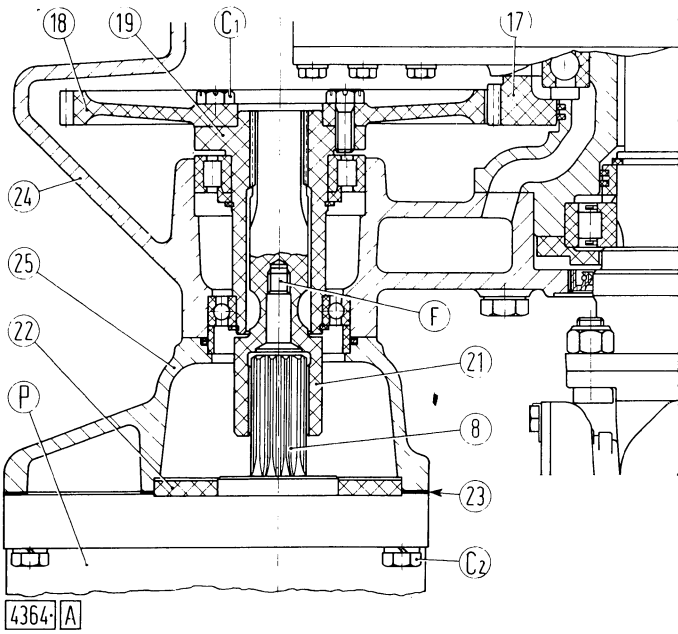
Section Through Equipment Hydraulic Pump Drive
